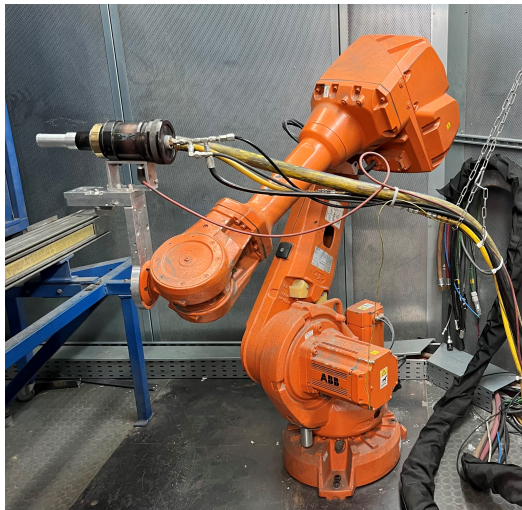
Kermetico AK-07 HVOF gun mounted on an ABB IRB4600 robotic arm
